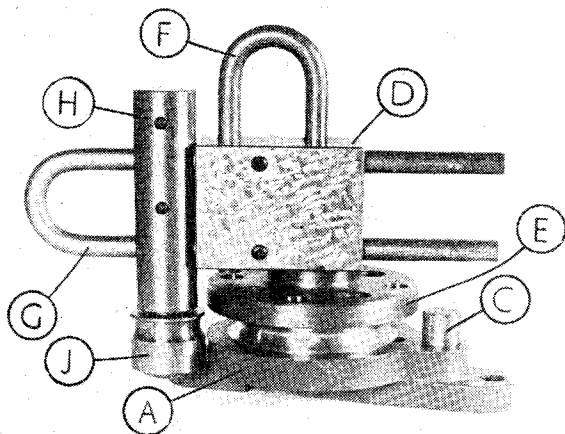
The machine set up for bending $\frac{1}{2}$ in. tubing
